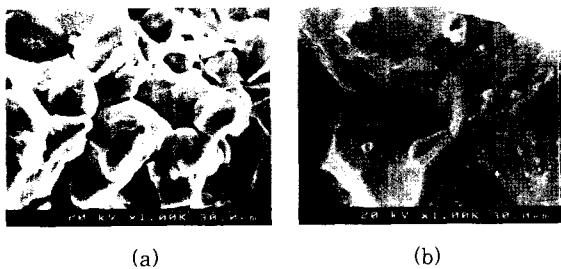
SEM microfractographs showing (a) solidification crack in weld metal and (b) intergranular crack in HAZ near fusion boundary of 6N01 welds
